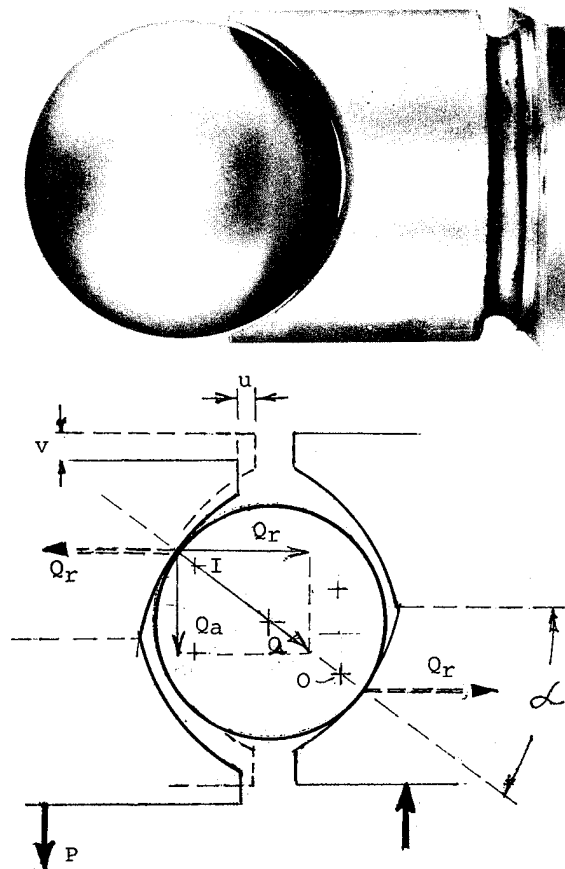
4 Point Contact Bearing. Deflection ( $u$ ) due to bearing moment load causes 2 point contact. Top photo shows race profiles at inner race loading plug.
